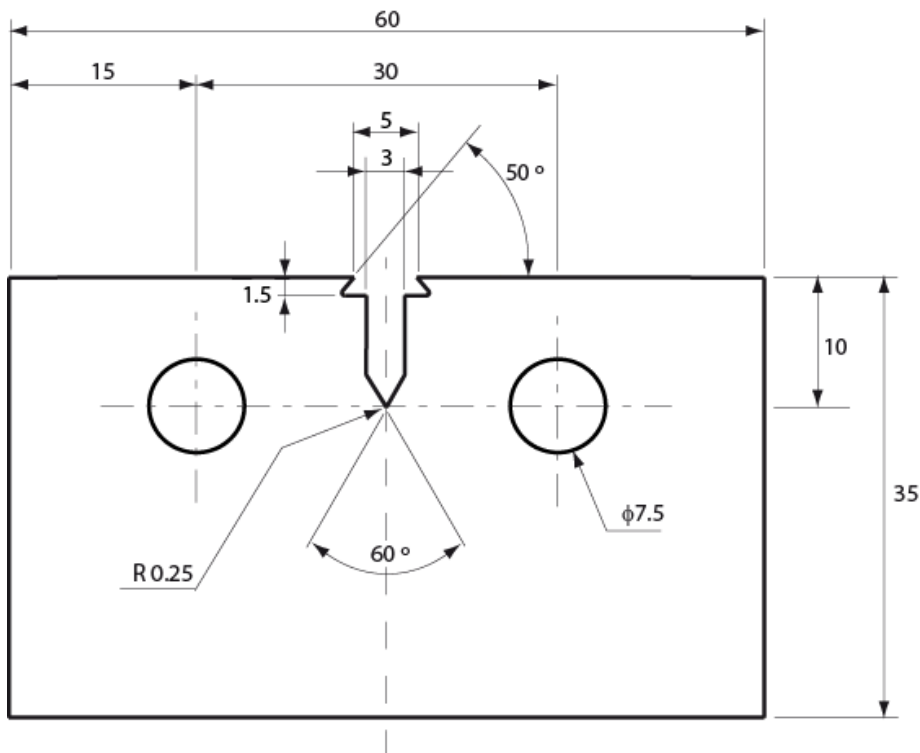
Sketch of the Kahn specimen used in the present investigation (dimensions in mm)
